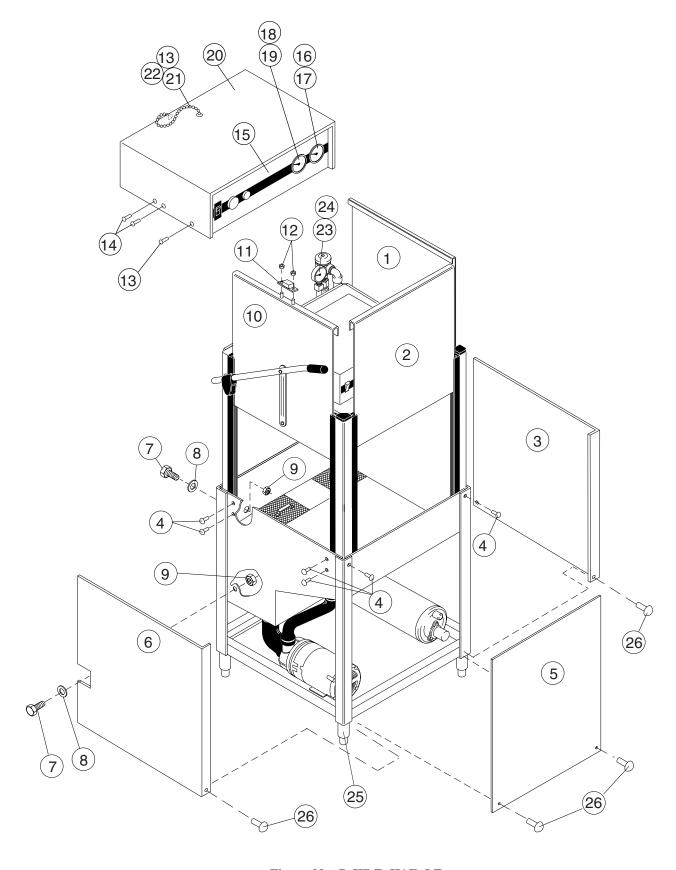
D-HB/D-H1/D-LF Doors, Panels and Gauges
